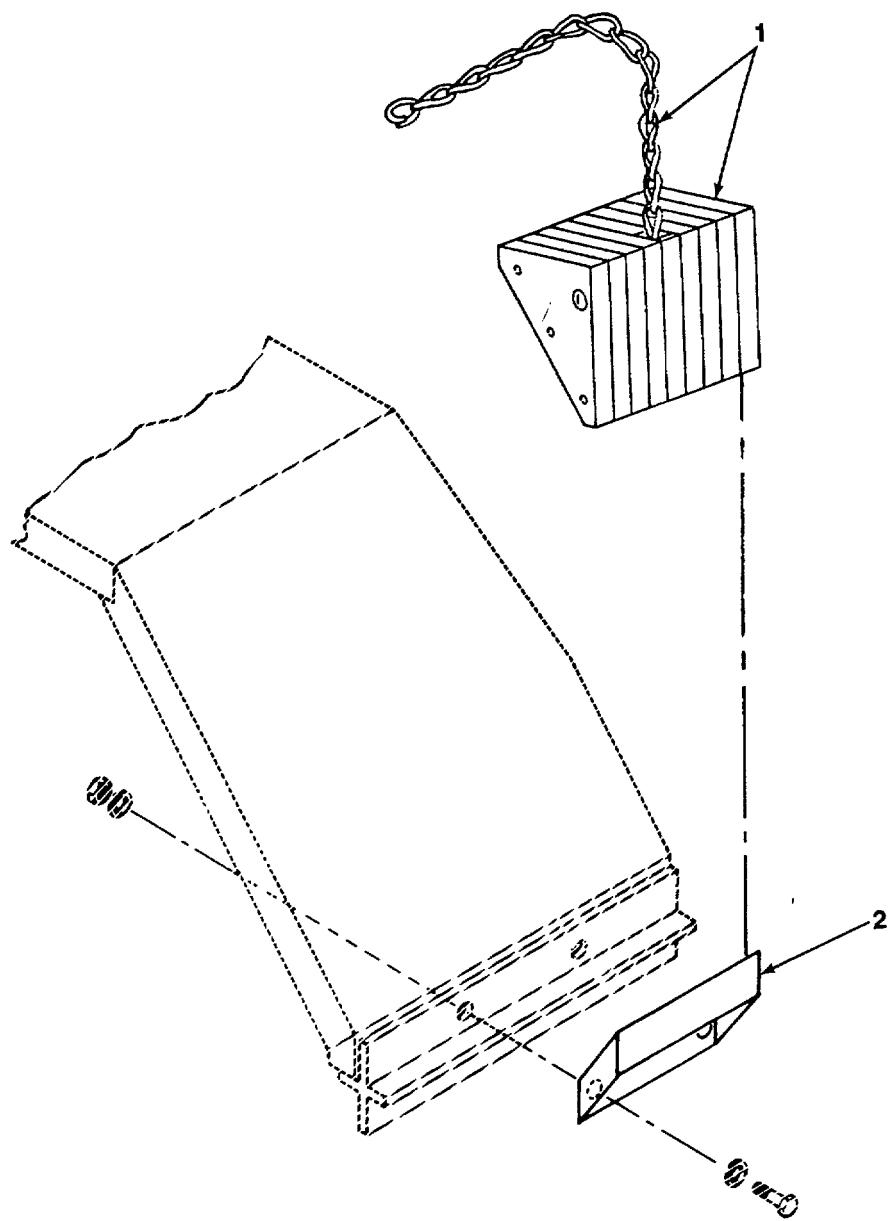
CHOCK BLOCK ASSEMBLY.
